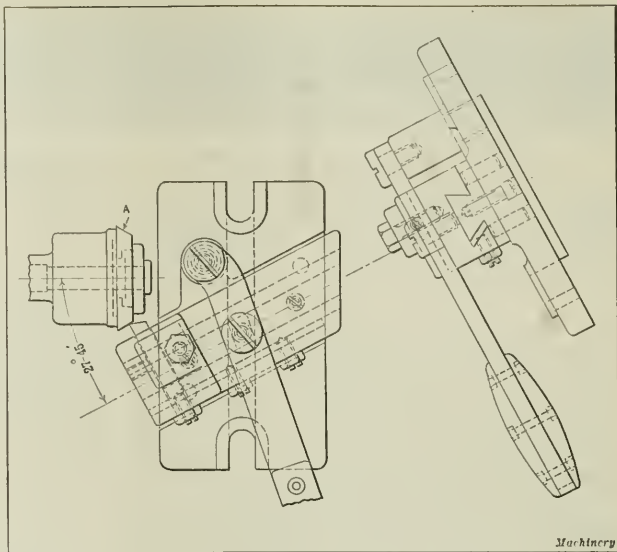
Auxiliary Cross-slide for Bench Lathes, Bench Mills, etc.
